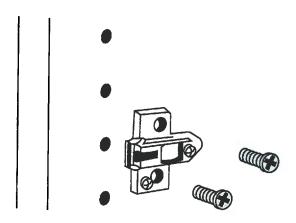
Euro-style screws that attach hardware into 5 mm holes.
